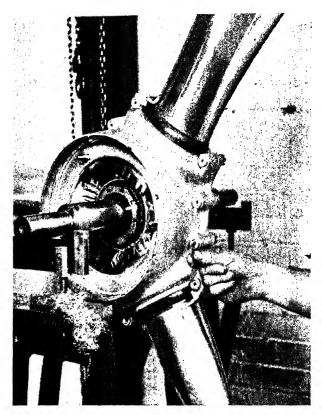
FILLING BARREL BOLTS WITH LEAD WOOL TO OBTAIN BALANCE OF HUB AND BLADE ASSEMBLY
